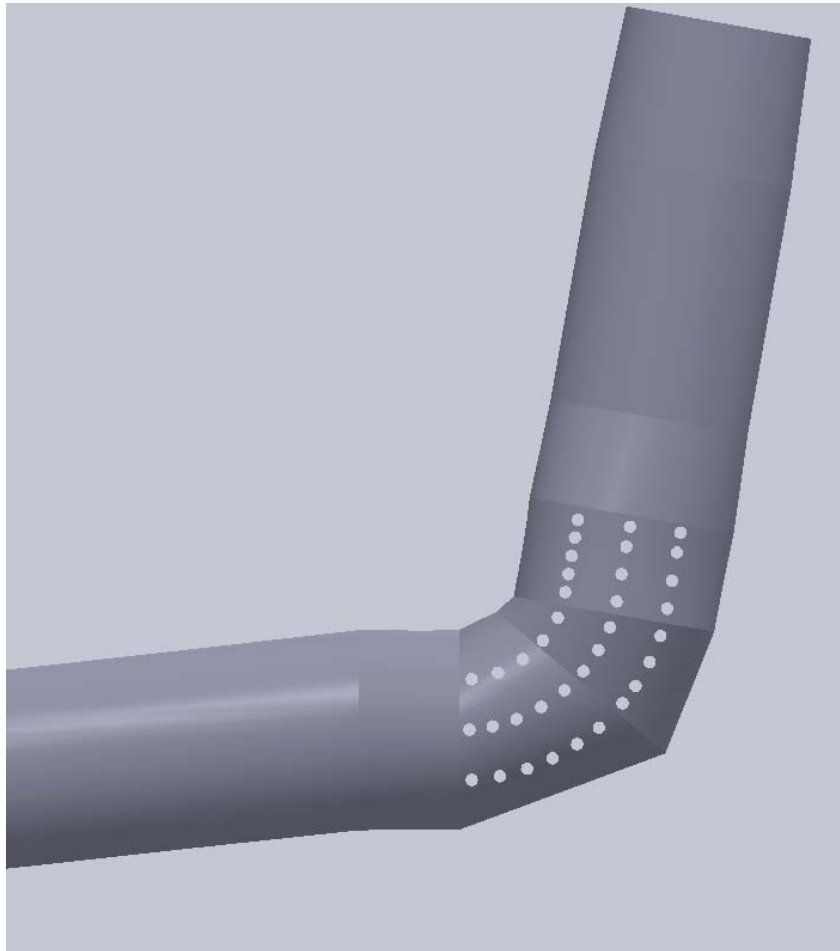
SolidWorks View of Final Design for Exhaust Duct Heat Exchanger.
